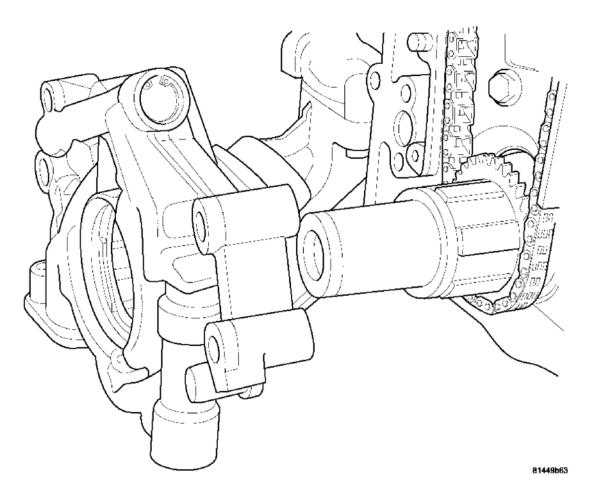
Removing/Installing Oil Pump Courtesy of CHRYSLER LLC
